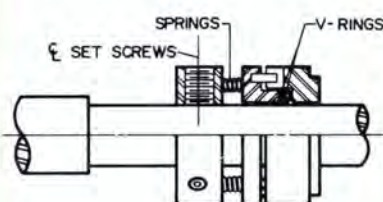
Pusher type mechanical seal with V-ring secondary shaft seal.
